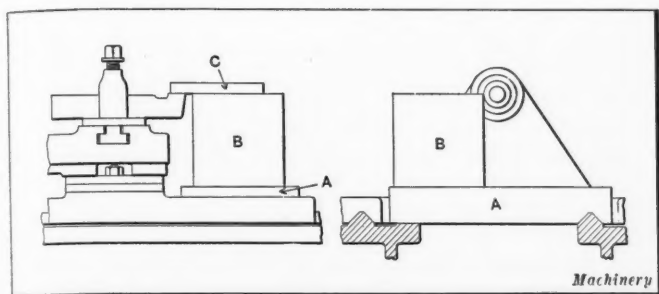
Satisfactory Method of inserting Tongue in Fixture
